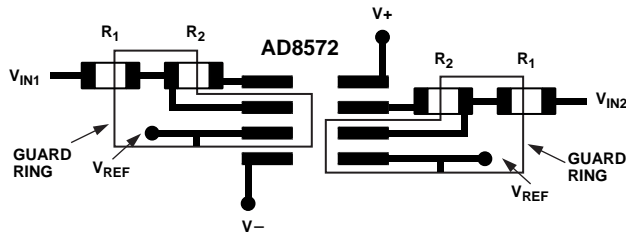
Top View of AD8572 SOIC Layout with Guard Rings
